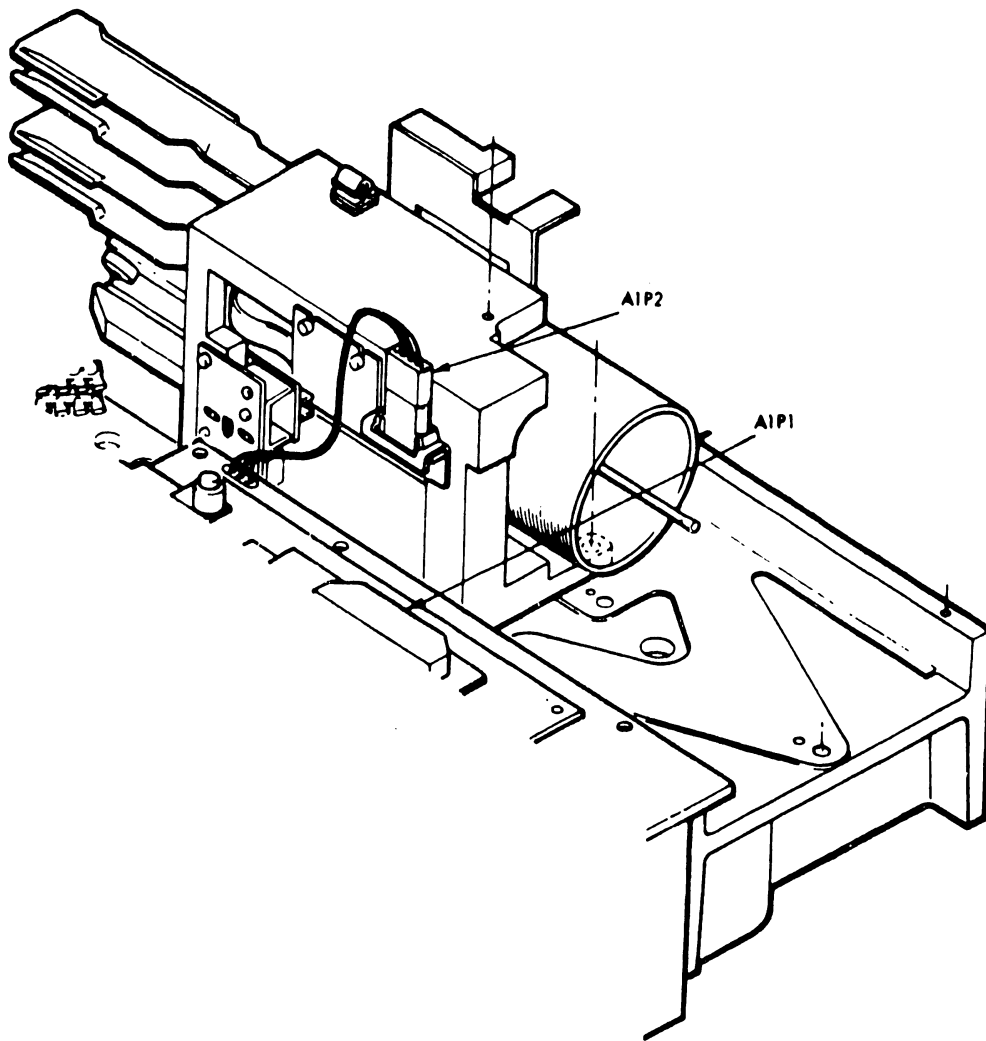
ACTUATOR ASSEMBLY (PARTIAL - SHOWING AIP2 LOCATION)
